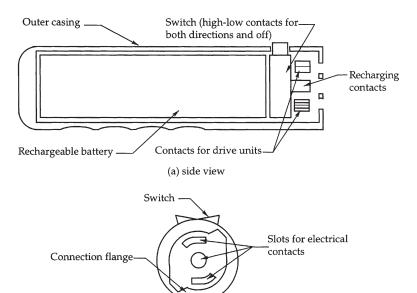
Schematic of a possible supply electricity module for the SKIL power screwdriver. The side view is shown in (a) and the end view in (b)
